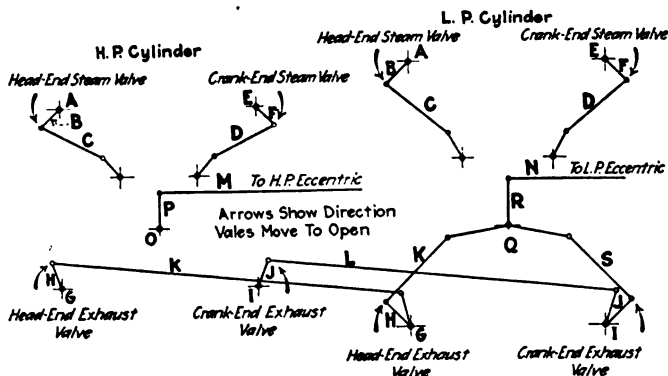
Diagram of valve gearing of Ridgway tandem-compound four-valve engine.
